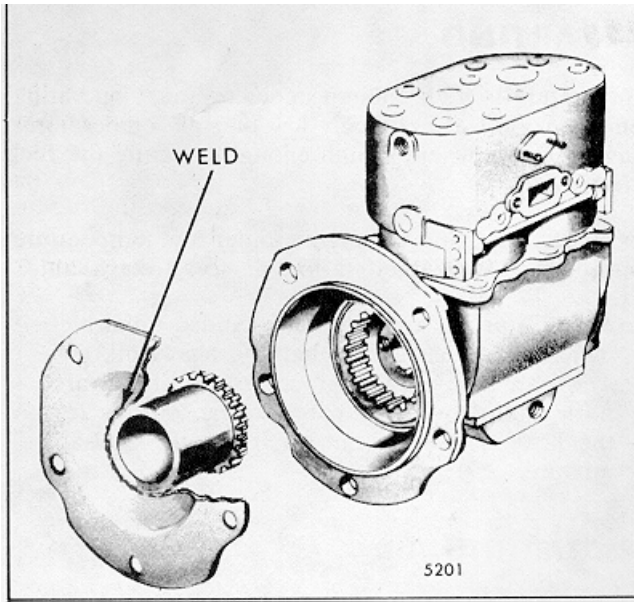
Fixture For Holding Drive While Installing or Removing Slotted Nut
